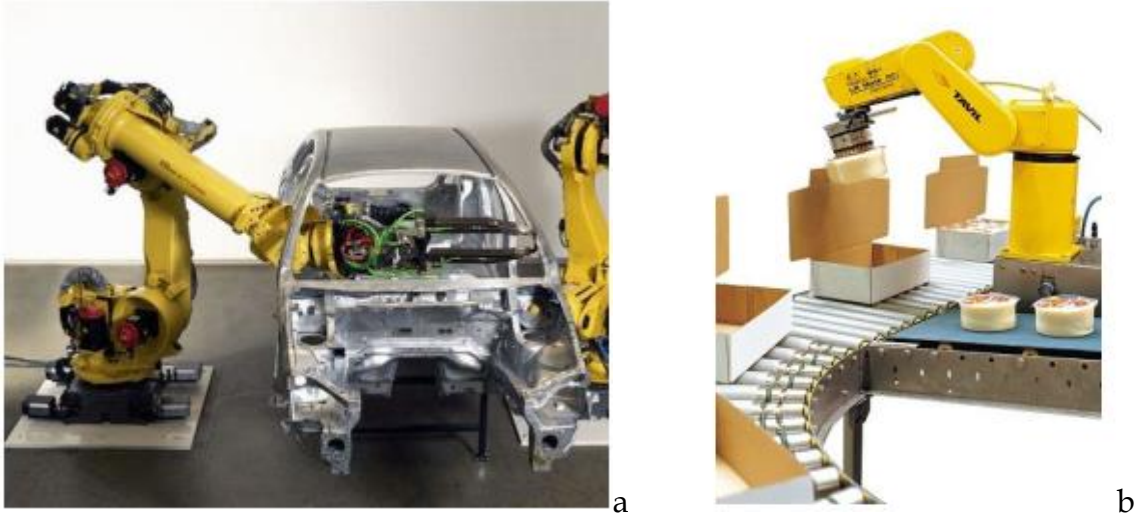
Industrial works: a - welding; b - packing
